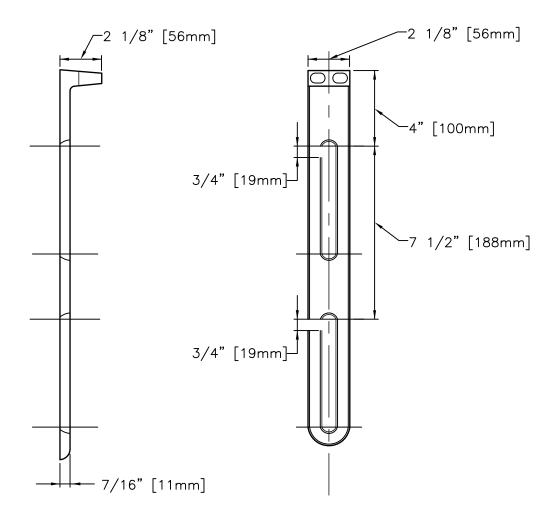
DETAIL TITLE / LAVATORY MOUNTING DETAIL
